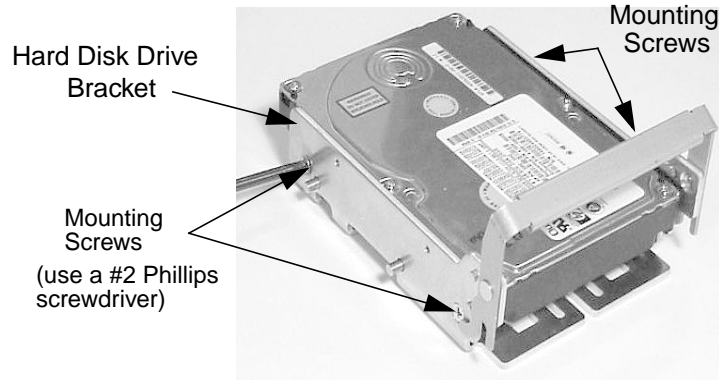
Installing the Hard Disk Drive into the Hard Disk Drive Bracket
